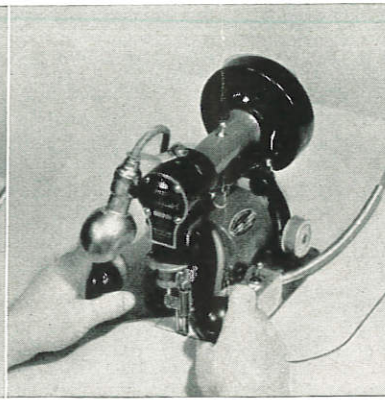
K9A Cutawl cutting toward the operator's left. The cutting mechanism alone does the turning
